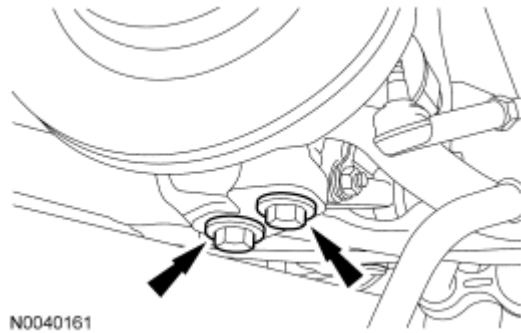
Locating Front And Rear Lower Control Arm Nuts
